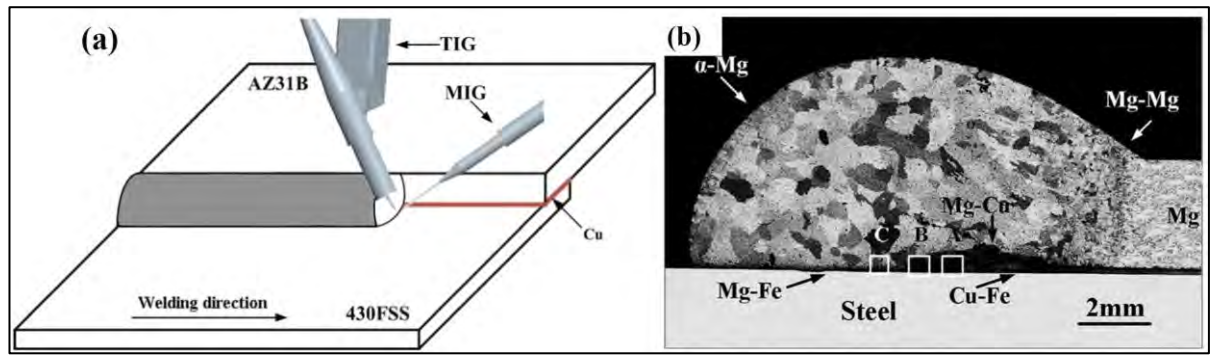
(a) Schematic of hybrid welding using interlayer (b) joint cross-sectional view with 0.1 mm thickness interlayer (Ding et al., 2018)
